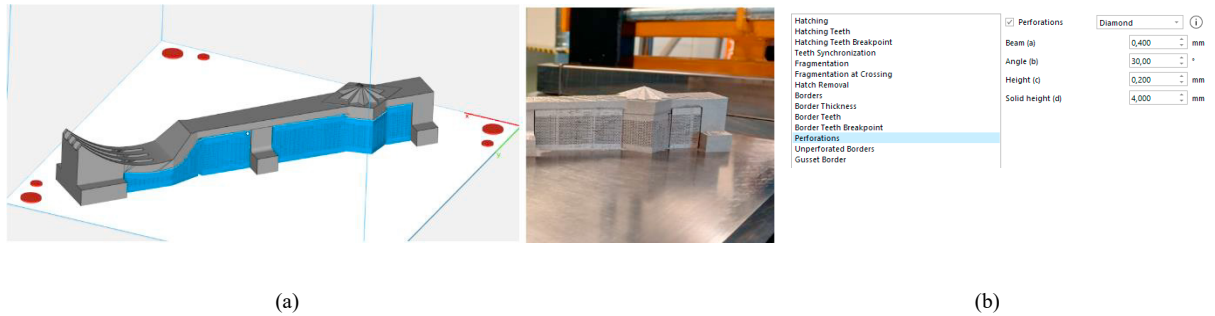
The fork is 3D printed in 316L stainless steel with excess material, then CNC machined for better quality. Additional solid supports are included to facilitate fixture attachment for clamping it onto the CNC machine (a); support parameters (b)
